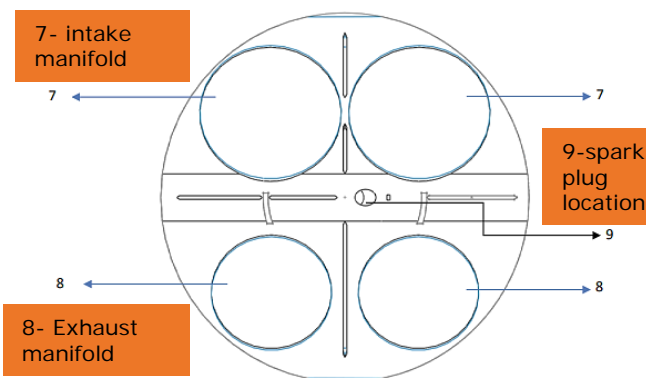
shows a Bottom surface of the cylinder head showing the position of the baffles
